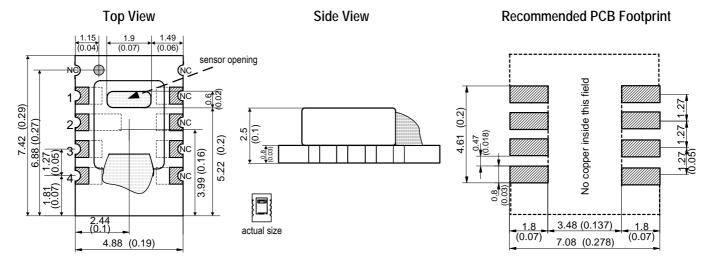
SHT1x drawing and footprint dimensions in mm (inch)
